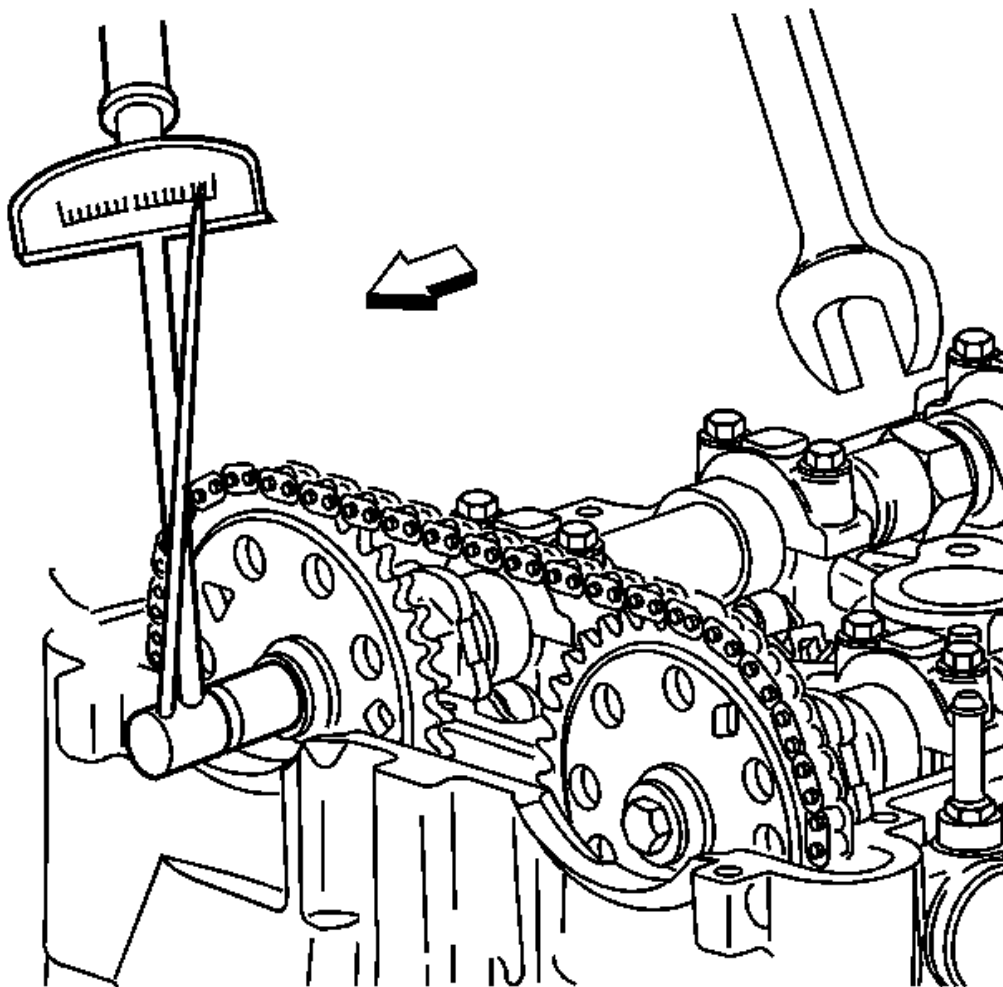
Holding Camshaft Stationary With Wrench On Hex Casting On Camshaft
